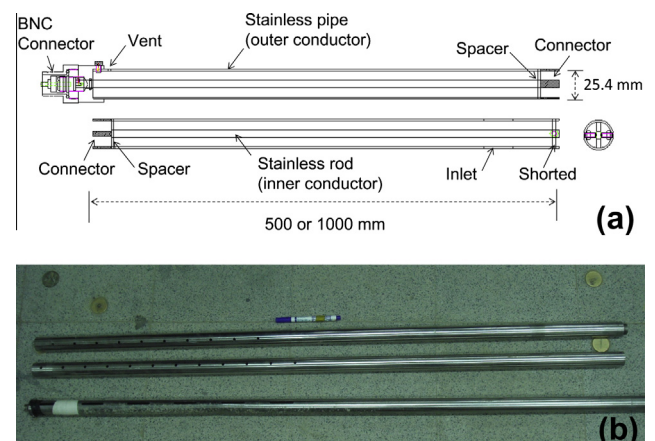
(a) A schematic of the assembled coaxial TDR water level waveguide and (b) a photo of the prototype.
